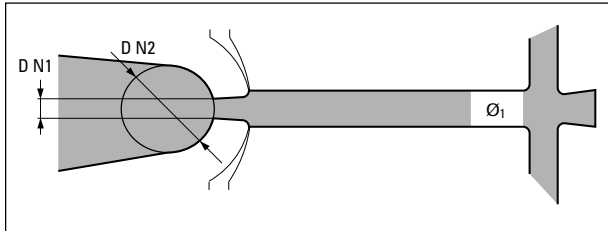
Example of a Design of a Nozzle Without Sprue Used with 2 Plate Molds. Remember that for Delrin® the Nozzle Temperature Should Not Exceed 190°C (374°F).
